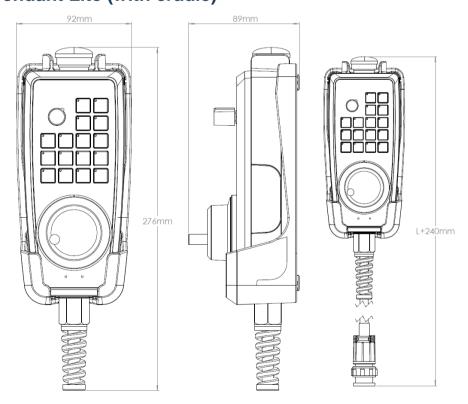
Remote Pendant Lite with Cradle Dimensions (mm)
